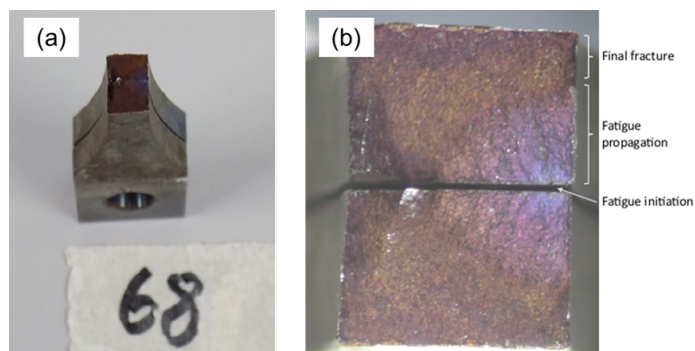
Picture of (a) fractured AM.LSP specimen and (b) closeup photograph of fractured surface in 550°C setting
